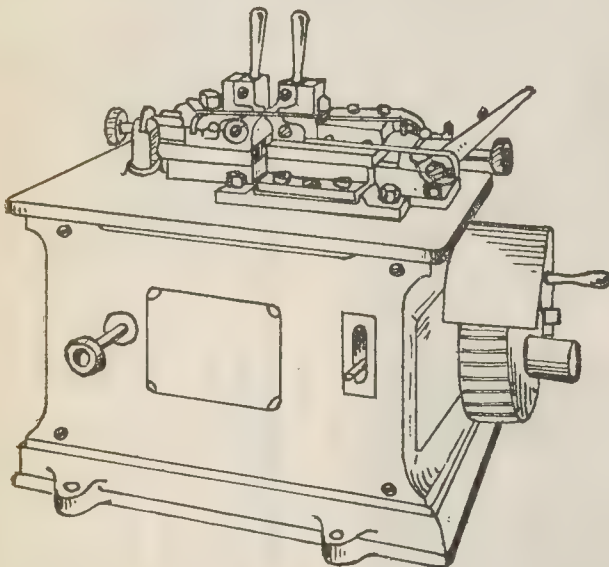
,031.—Thomson welder. Portable pressure and cut out, mercury slide, with regulator and automatic break switch. Copper wire No. 23 to No. 15. Power 1.5 kw. Time, fraction of second. To operate, move lever at right to position shown; hold back levers at center and insert wire; return lever at right to opposite position; press button and the weld is made.
